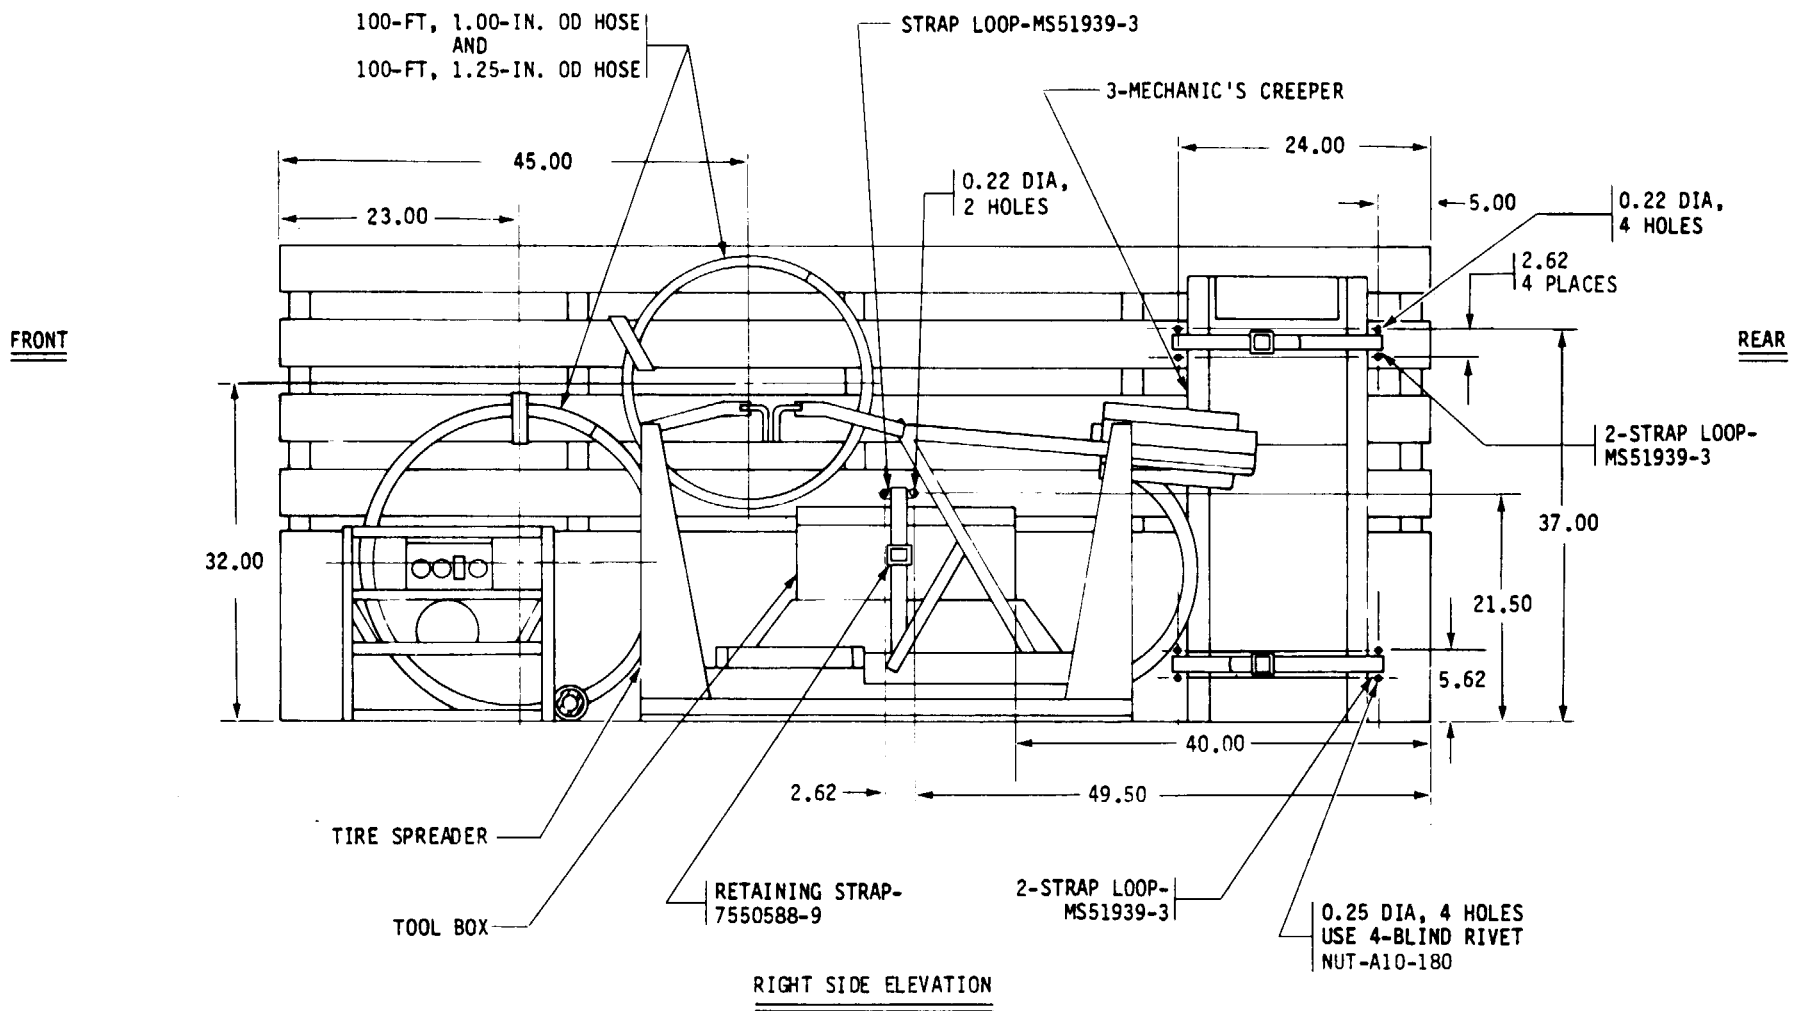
Hole Dimensions for Blind Rivet Nuts and Strap Loops, Unit 6, M105A2, Right Side Elevation.
